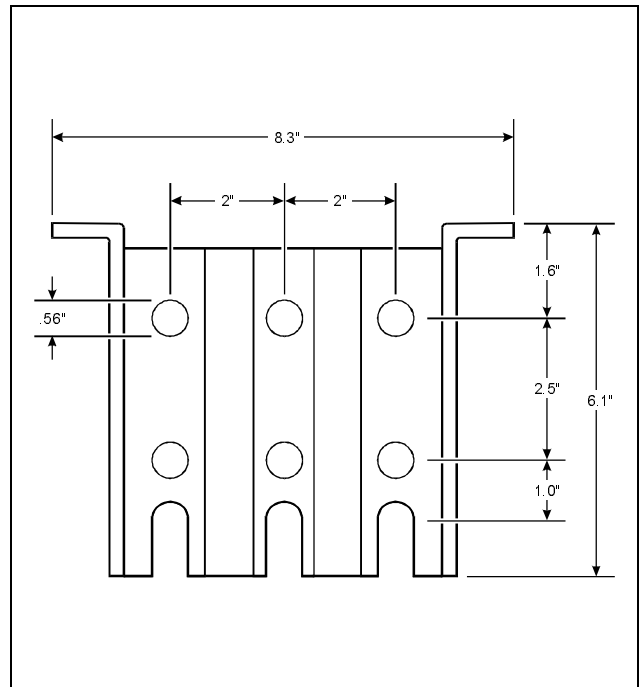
Mounting Bracket Dimensions. Four bolts hold the mounting bracket to the enclosure baseplate.
